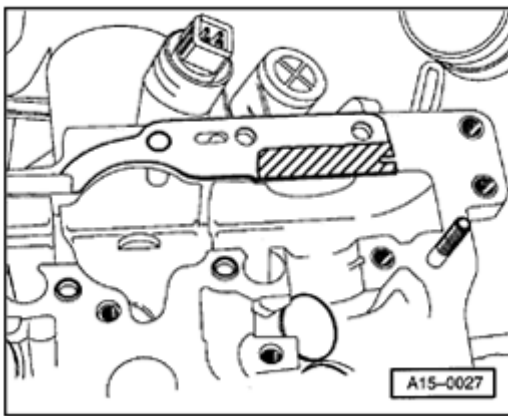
Replacing Rubber/Metal Camshaft Adjuster Gasket And Spreading Thin Layer Of Sealant On Hatched Surface
